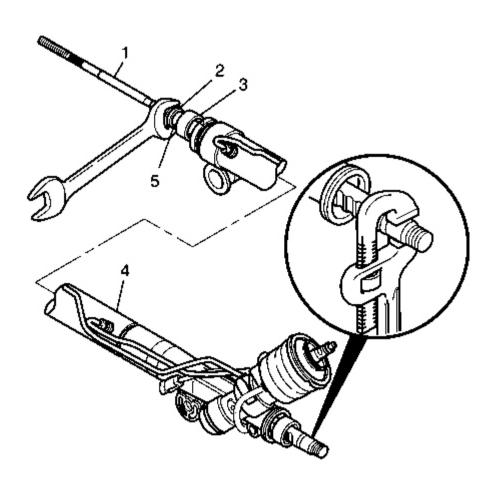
Right Inner Tie Rod Housing, Shock Dampener Courtesy of GENERAL MOTORS CORP.
